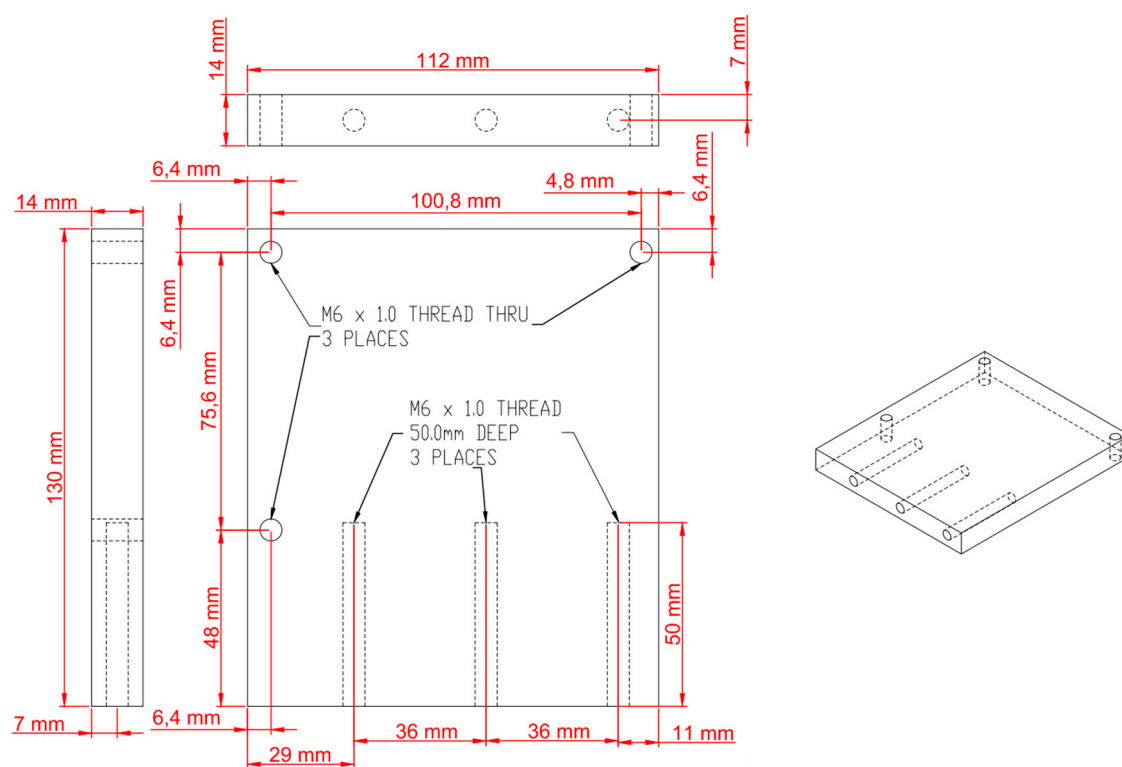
Detailed mechanical drawing of Part 12 from Figure S1.
